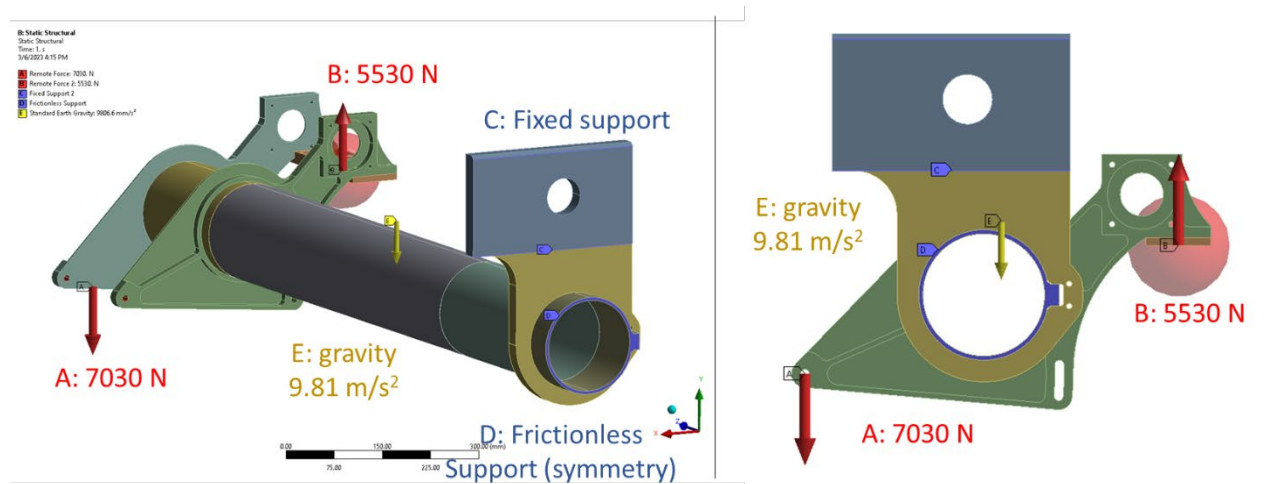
Loadings and Supports on model of crossbar and supports. (left) isometric view (right) side view showing opposing forces on A: the tine support pivot point, and B: the screw jack mounting plate.
